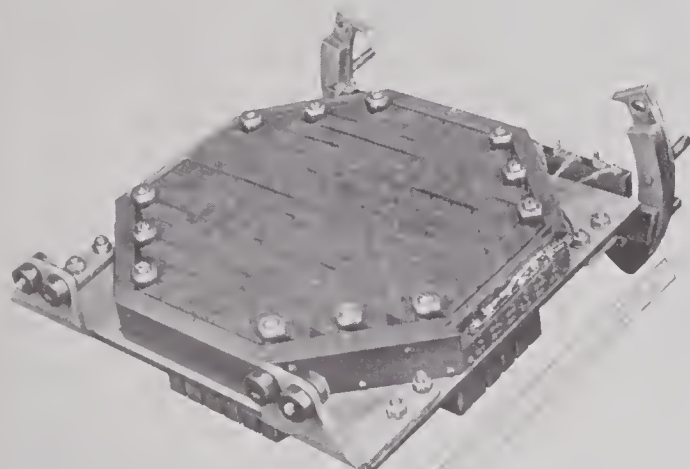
Another view of the transducer motor shown in Figure 6.
